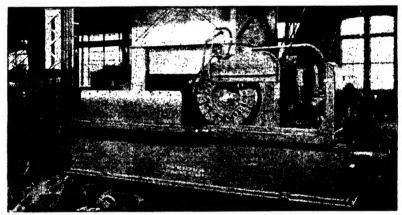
A Diamond Machine Company face-grinding machine utilizing the face of the large grinding wheel shown.
